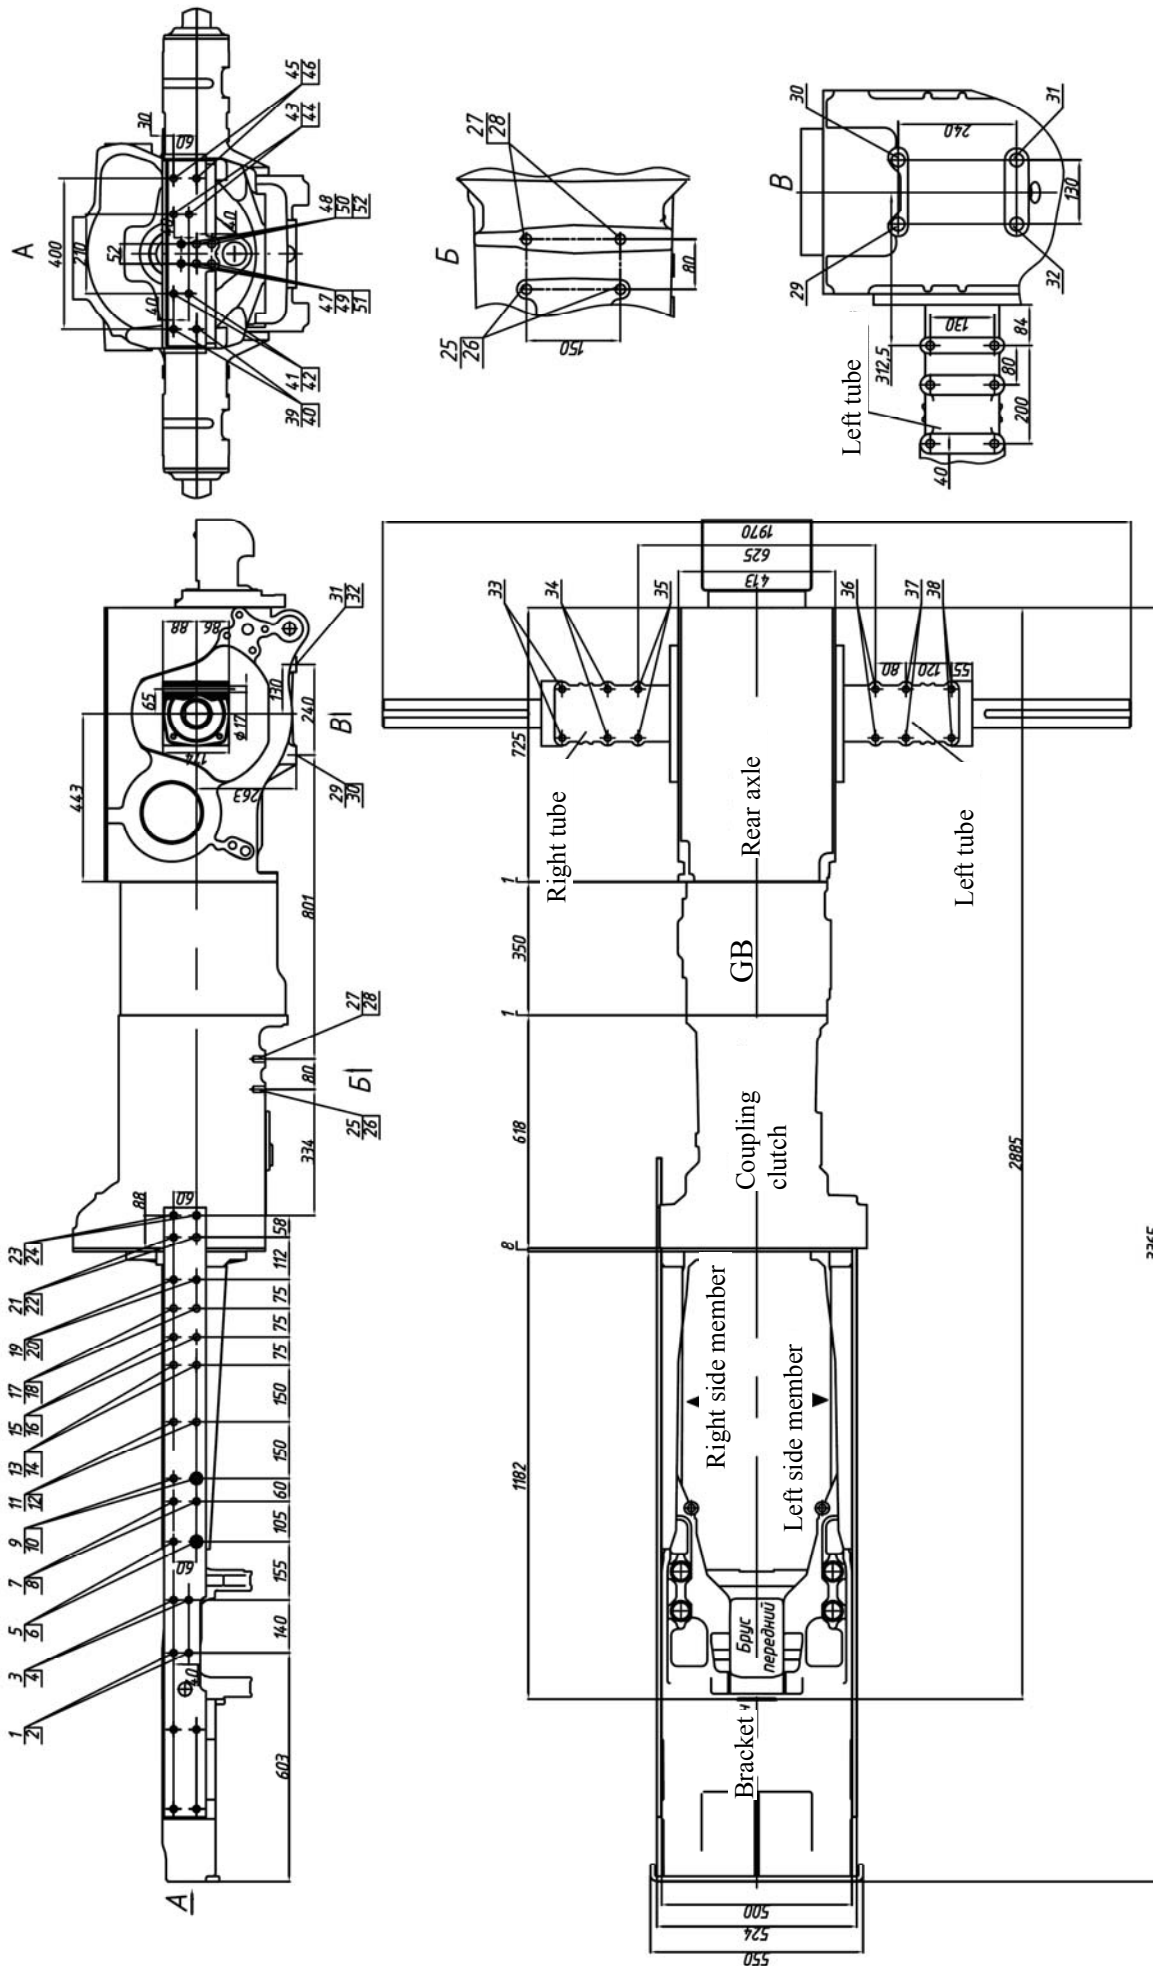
Mounting holes arrangement scheme for tractor BELARUS-952.5
